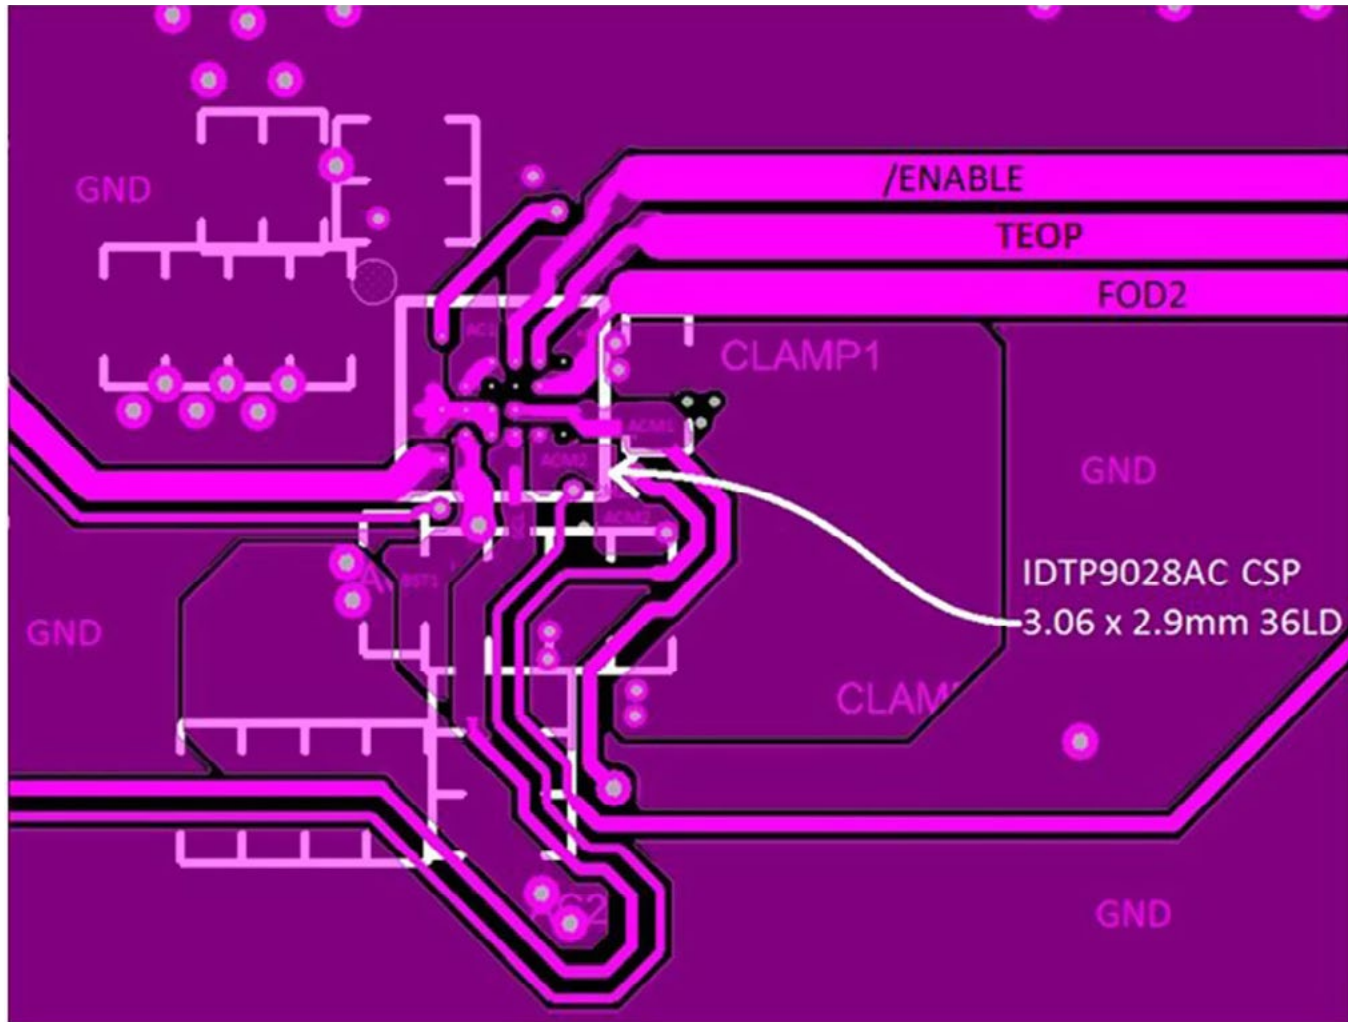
CSP device mounted on a four-layer PCB, third PCB layer shown (mid-layer 2).
